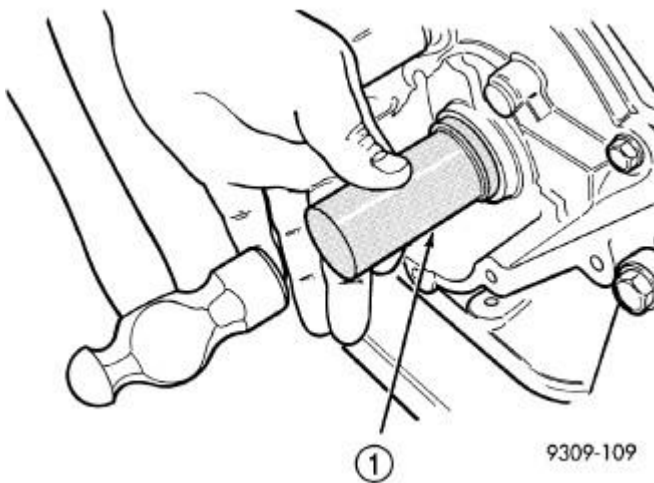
Crankshaft Oil Seal with Special Tool 6342 - Installation
